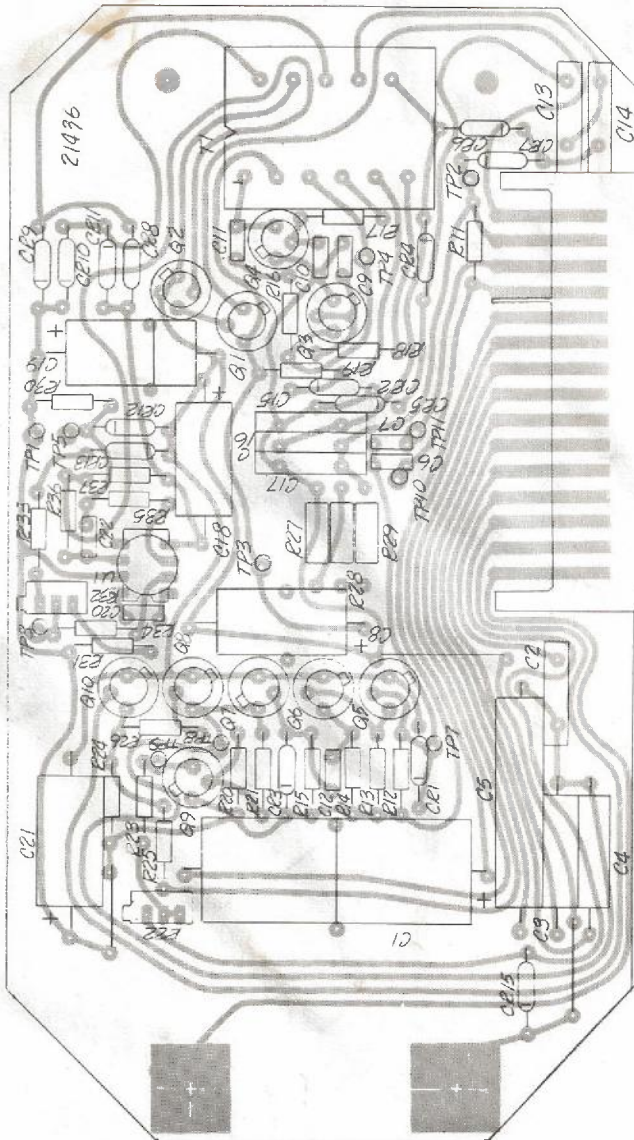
Parts Location, Printed Circuit Board Assembly 1A1
